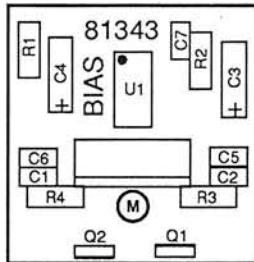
54. 81343 PA BIAS BOARD COMPONENT LAYOUT
